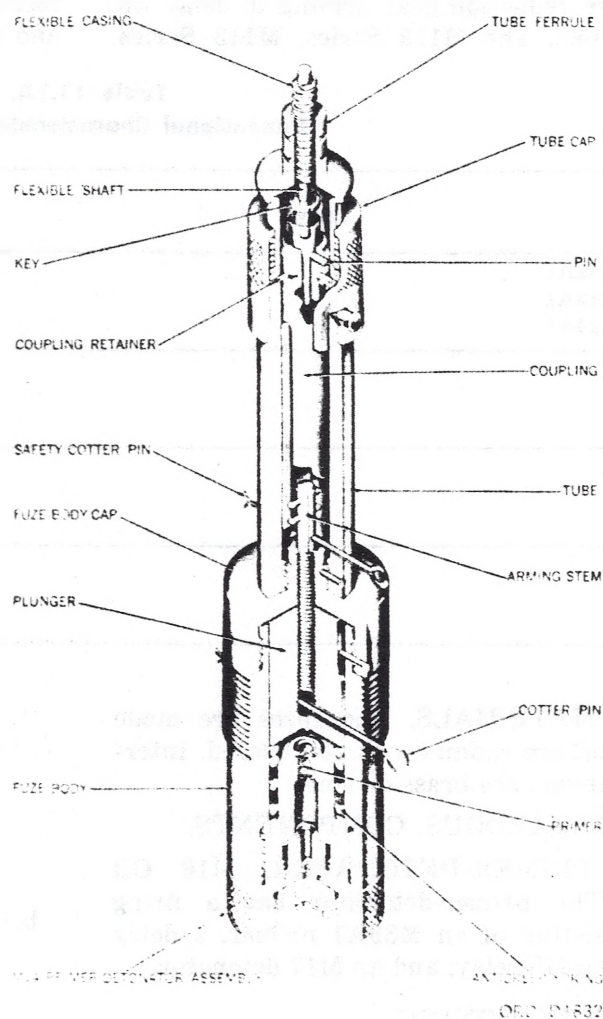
Cutaway View of Fuzes M190 and M191 in the Unarmed Condition
